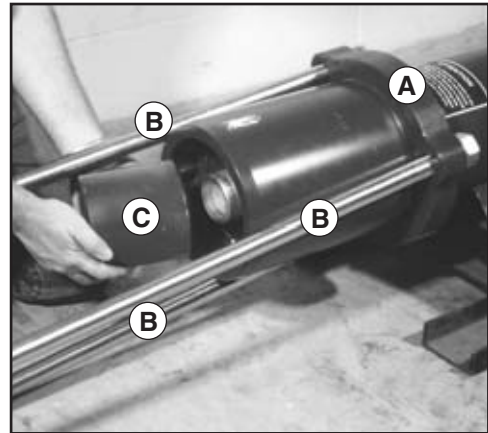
CARRIER CONE & DRAW RODS OF CLAMPING DEVICE
